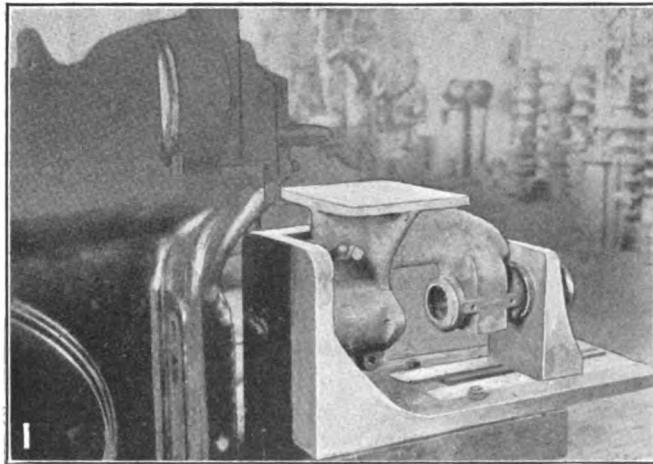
PUMP BRACKET IN THE SHAPER. FIG. 2. SHAPER FIXTURE FOR PUMP BRACKETS
